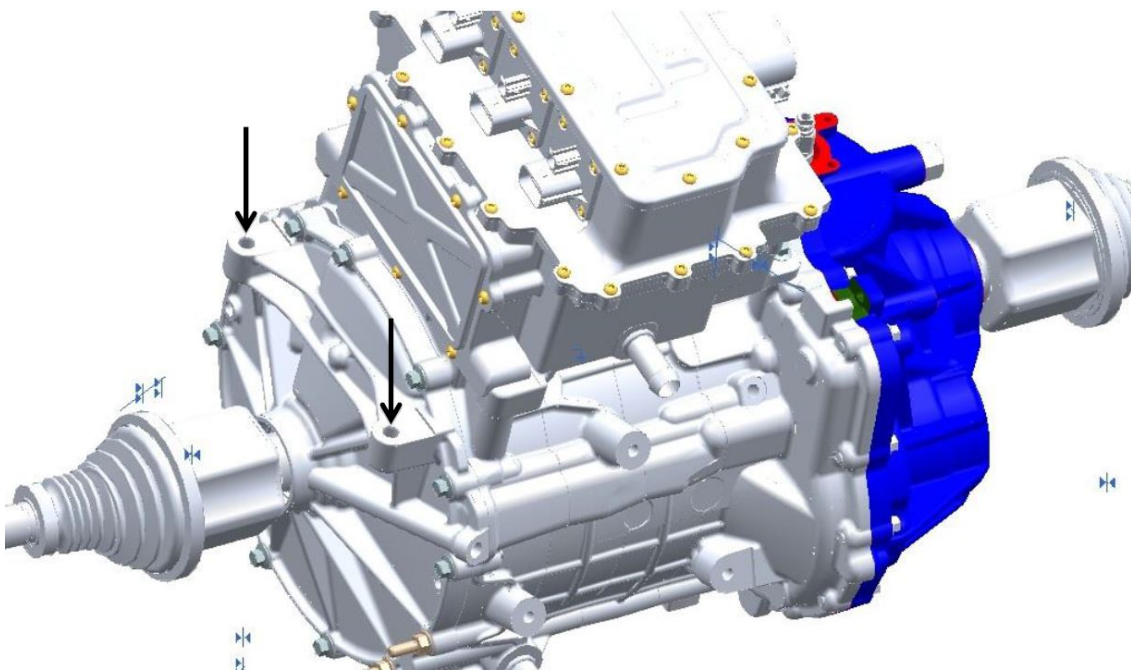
Passenger's Side Mounting Points on Magna E-Drive.
